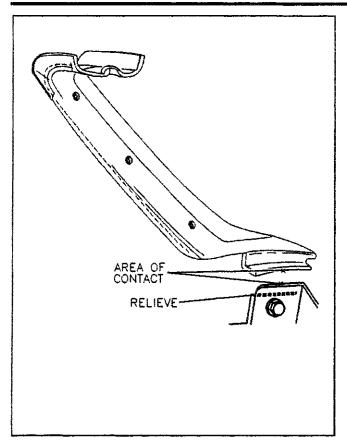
Instrument Panel—Garnish Molding to Carrier Attachment.
